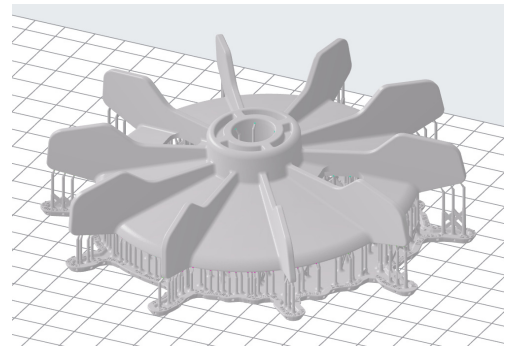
Pre-processing layer preview for MSLA 3D printing
